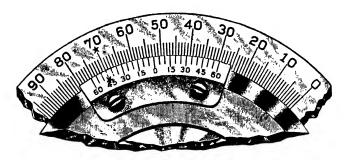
How to Read Universal Bevel Protractor with Vernier.
